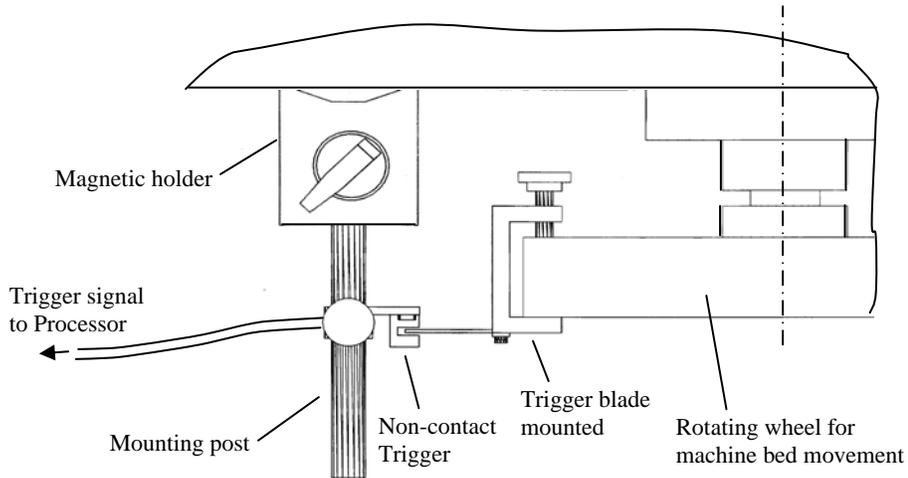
Schematics of the external trigger set up for non-stop synchronized data collection for a CNC machine tool.
